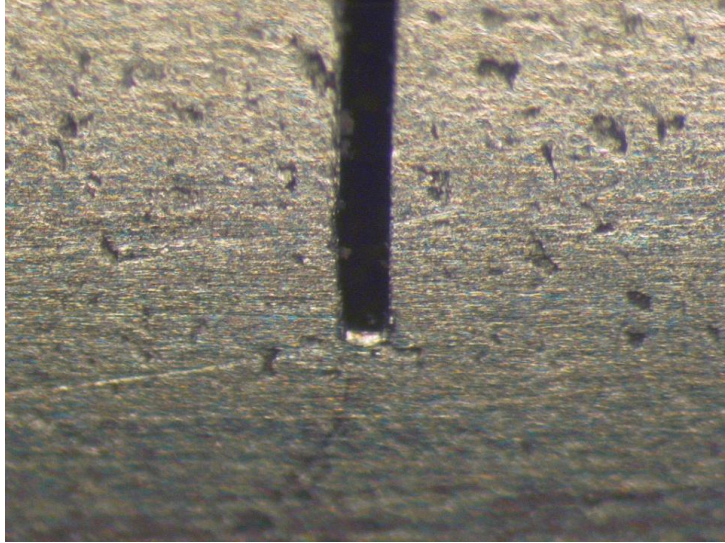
Bottom of Wire EDM Cut in Rotor
